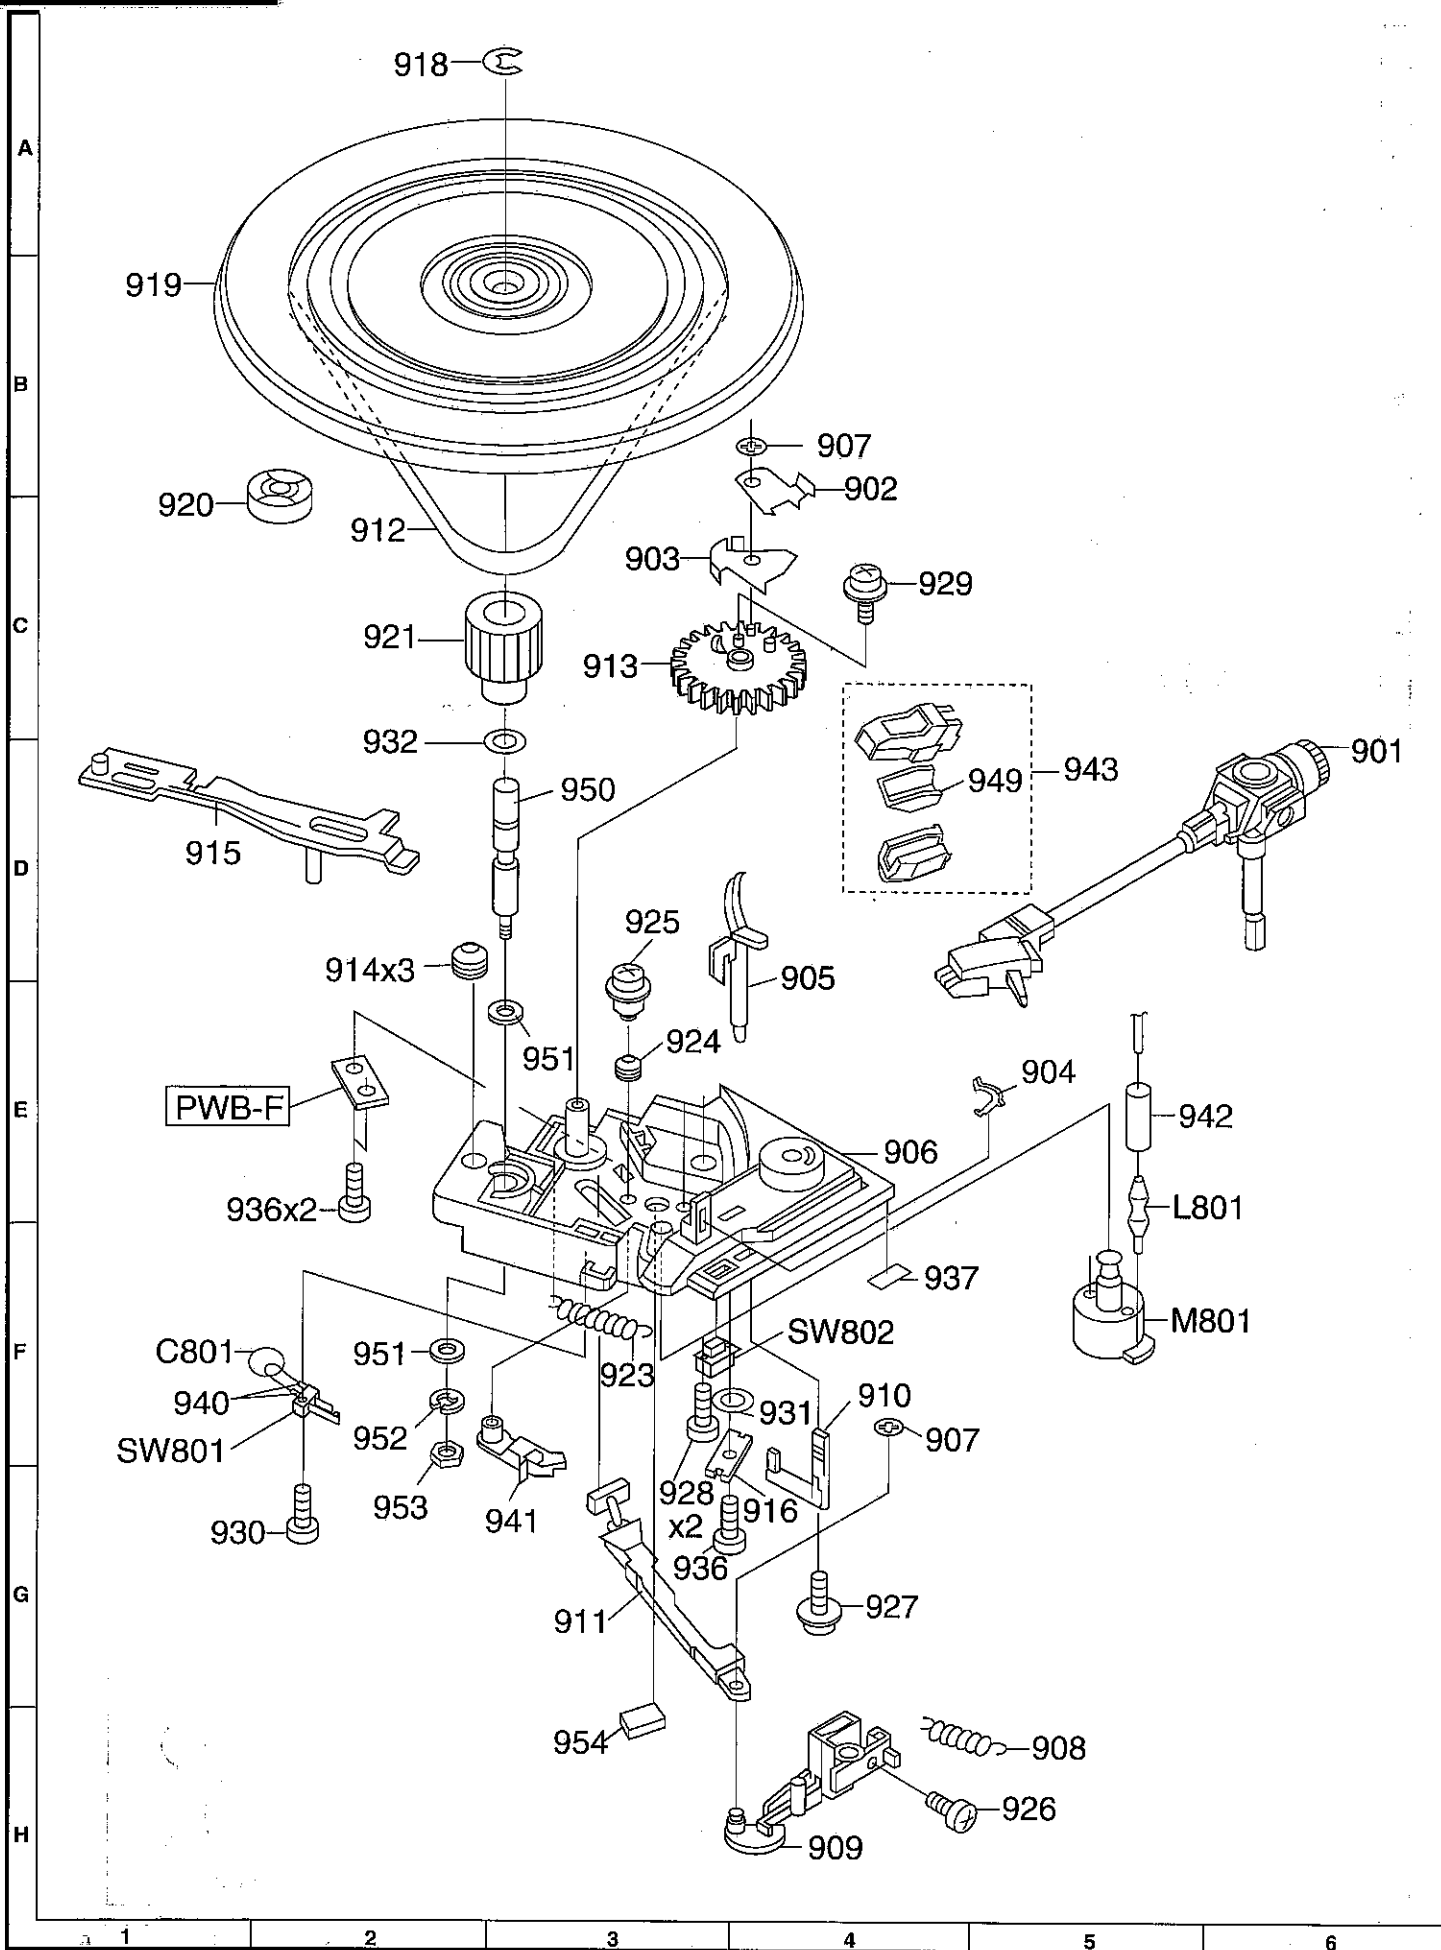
PLAYER MECHANISM EXPLODED VIEW
